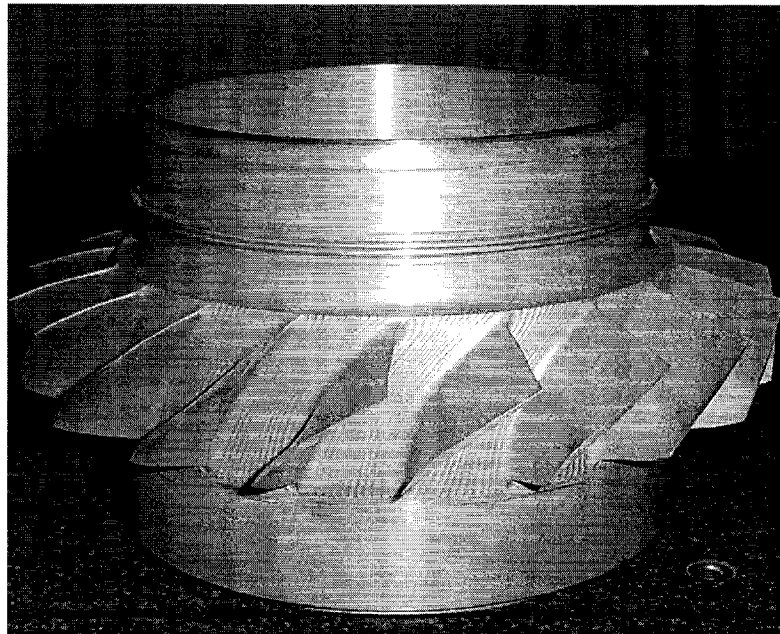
An integrally bladed rotor for the multistage compressor of a P&WC gas turbine engine
